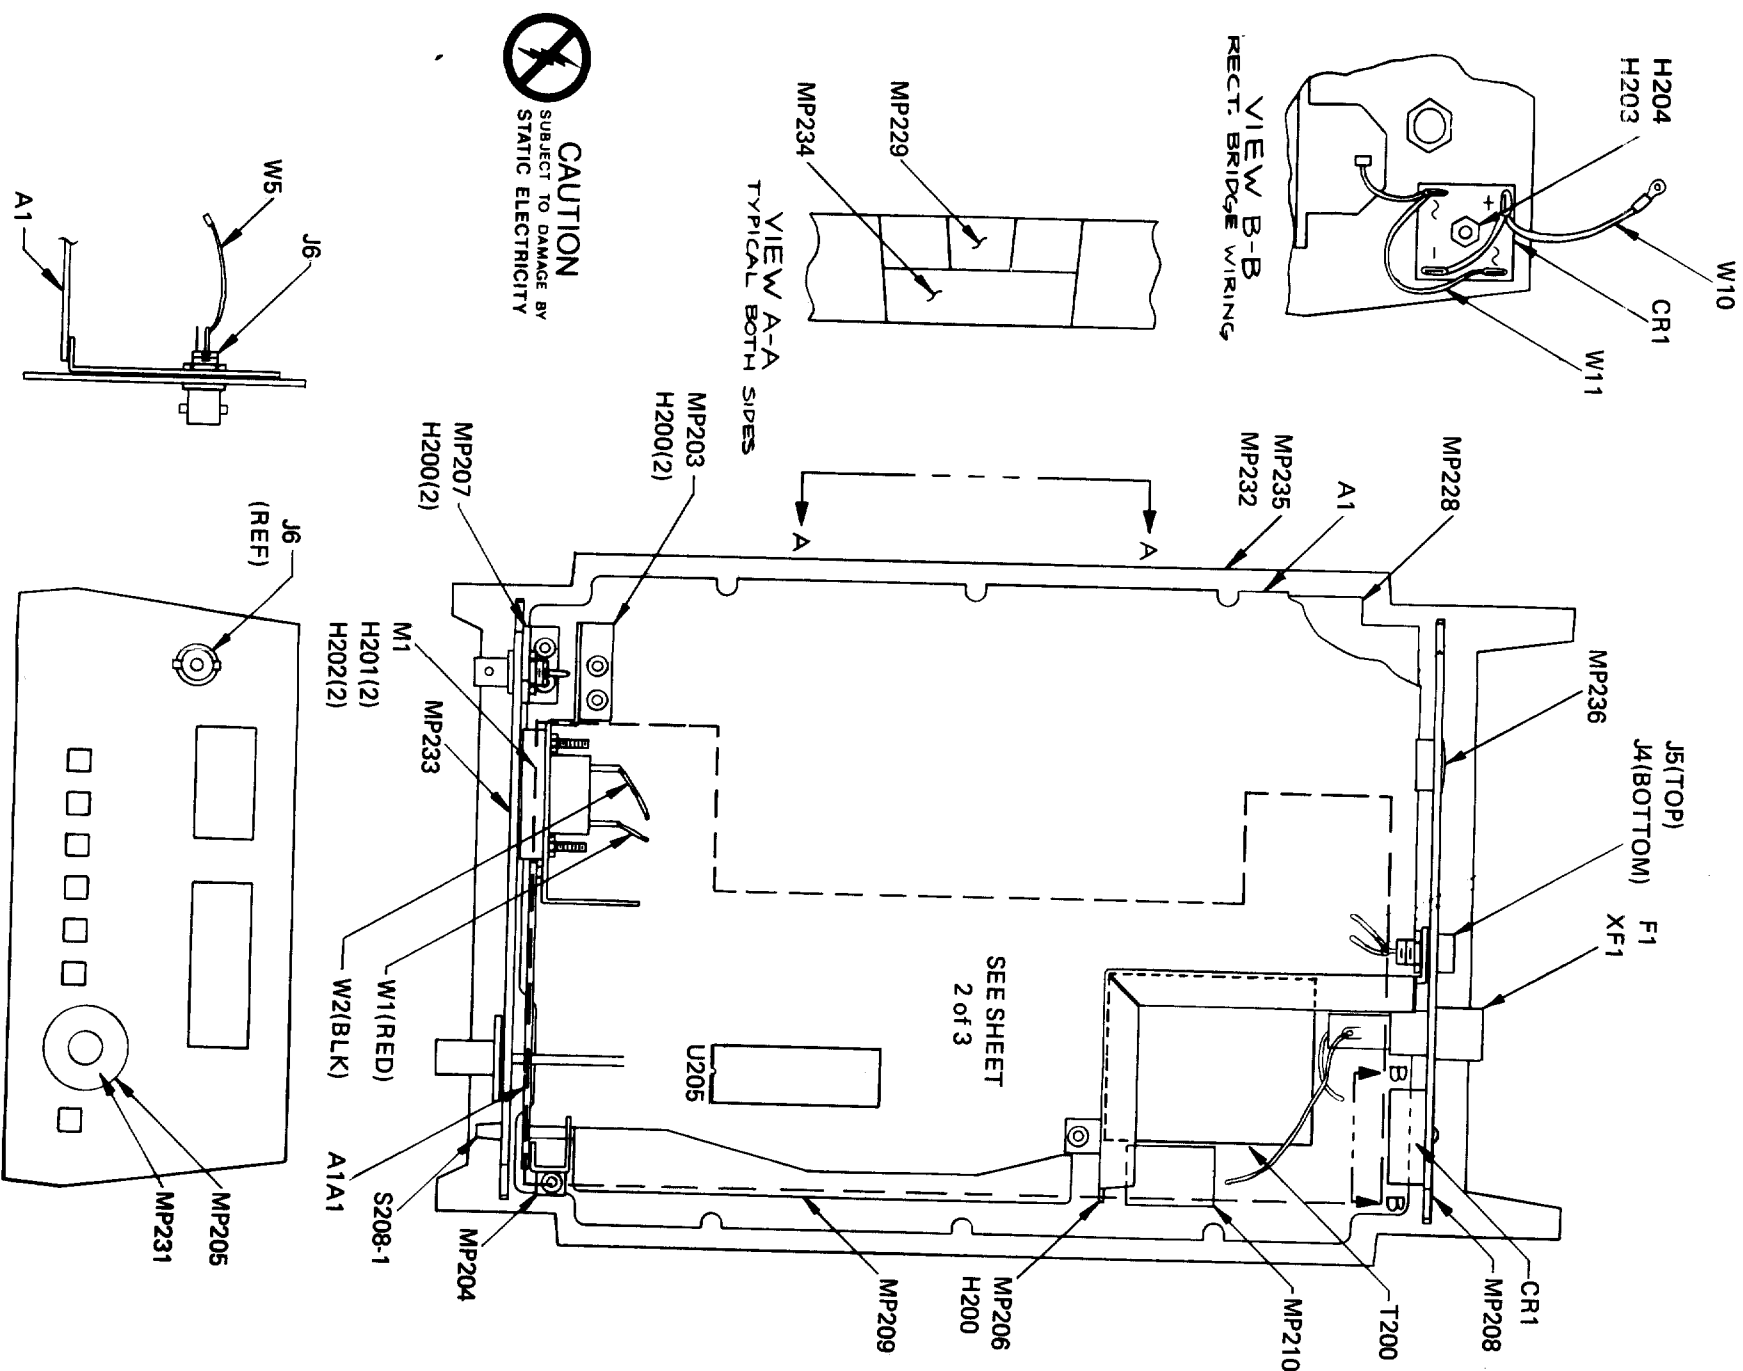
A1 8920A Main PCB Assembly (Sht 1 of 3)
